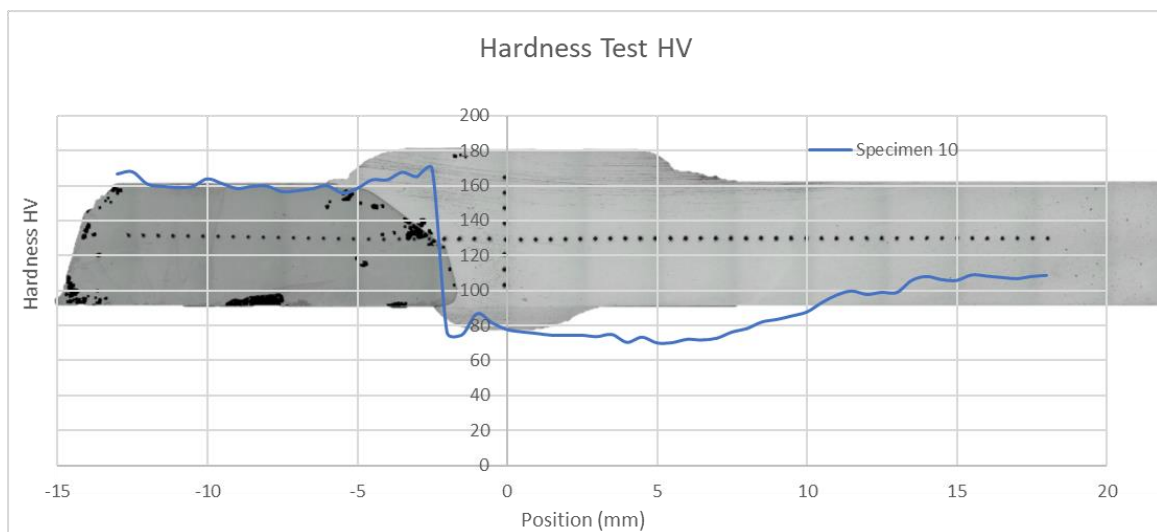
Horizontal hardness values in their position on the welding.
